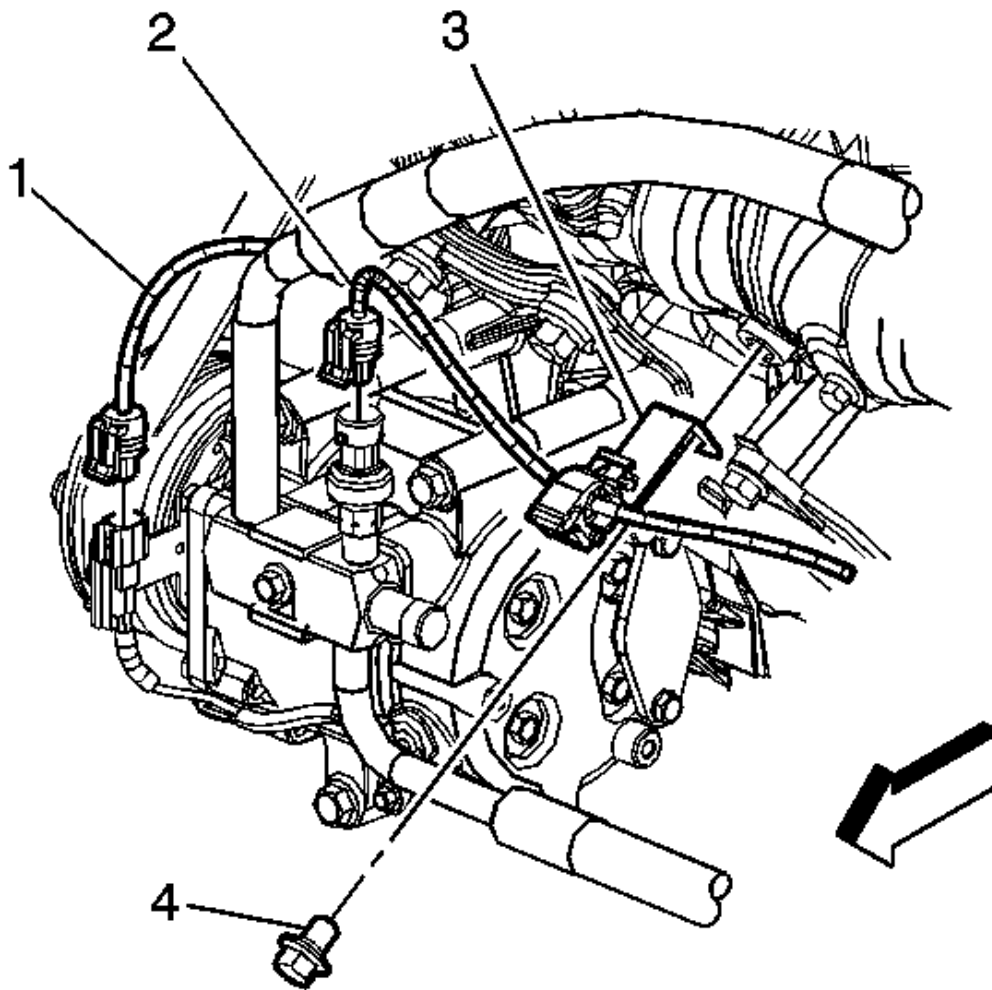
View Of A/C Compressor Clutch, A/C Refrigerant Pressure Sensor & Wire Harness Retainers
